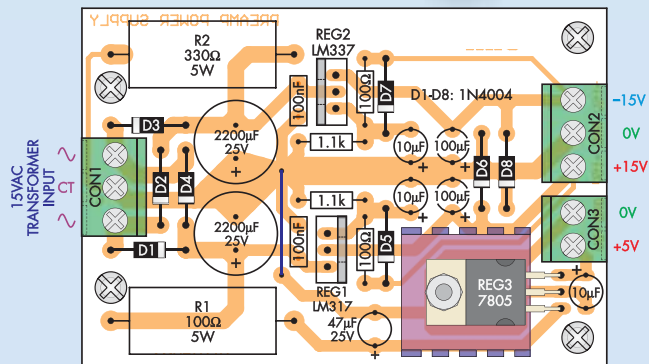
here's how to build the Power Supply Board. Don't get the 3-terminal regulators mixed up and note that REG3 is fitted with a heatsink.
